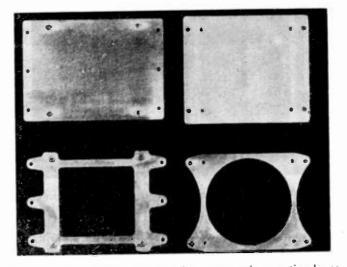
Antenna tuning unit and dynamotor unit mounting bases for aircraft radio transmitting equipment. View showing aluminum-alloy construction (top row) and alternate steel construction (bottom row).
